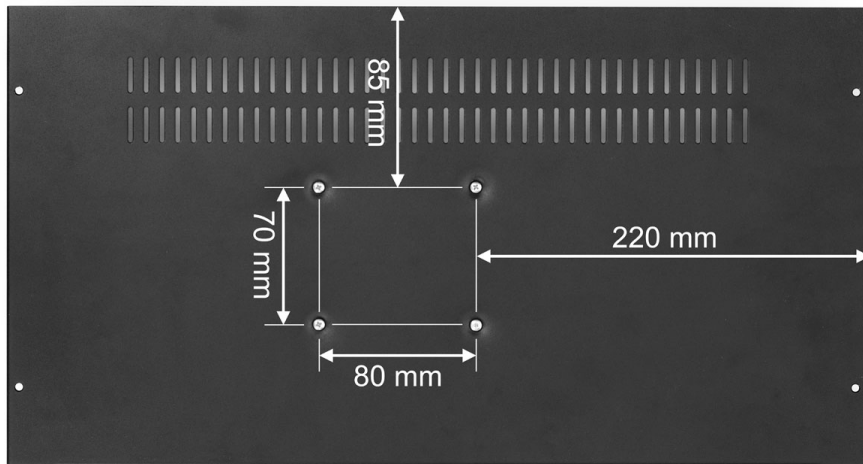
Drill hole positions for the V/UV detection board on the enclosure bottom cover. This is the view from the outside face of the cover (the V/UV detection board is later to be placed on the opposite side).
